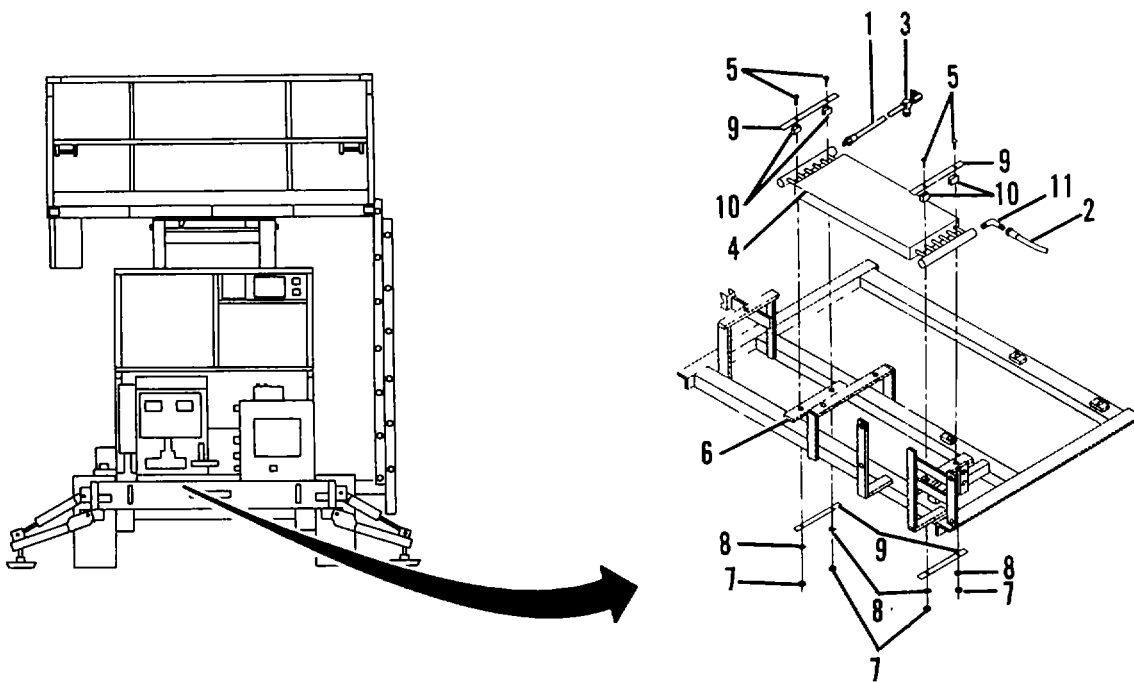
Oil Cooler Replacement (Sheet 1 of 2).
